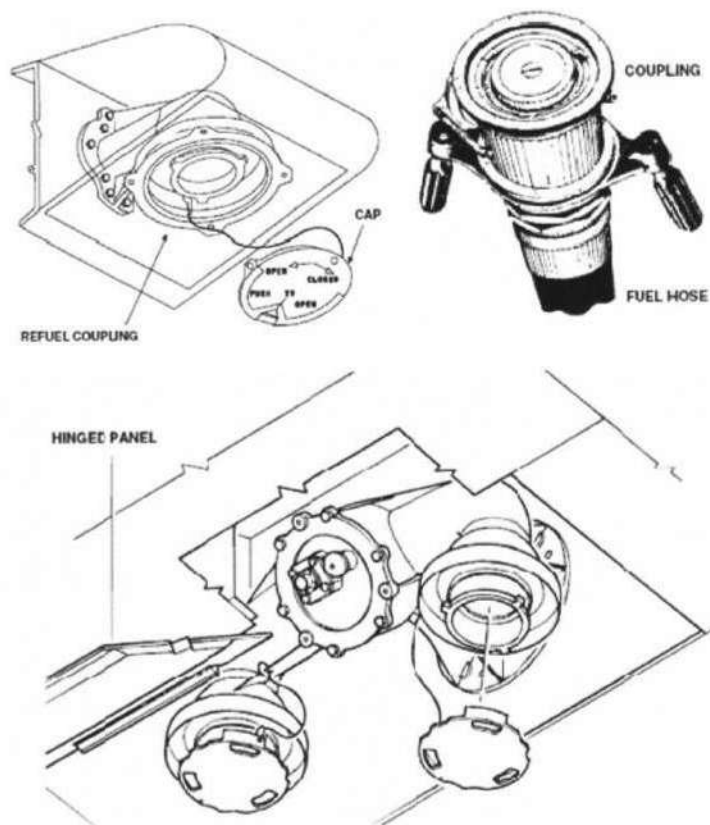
Refuel / defuel panel and coupling Valve Actuation
